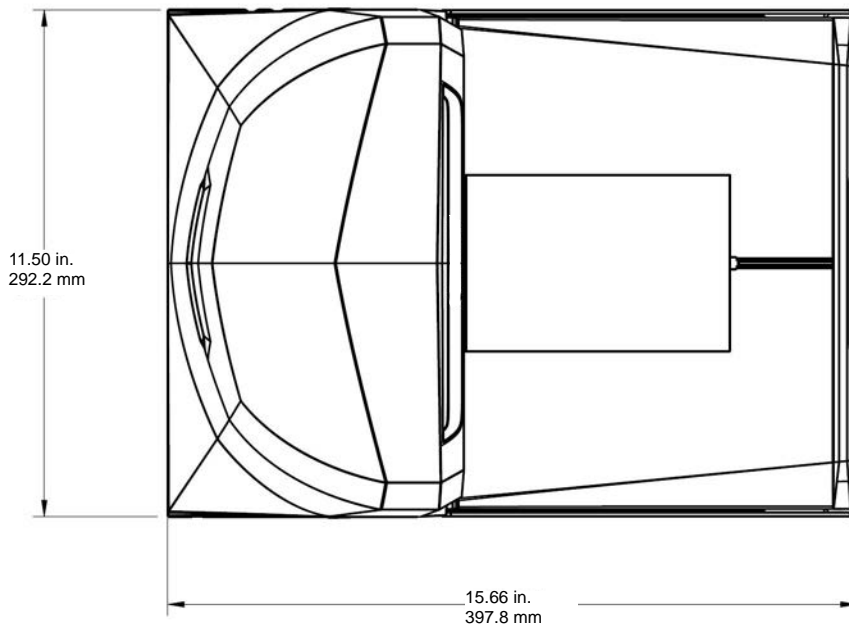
MP6000 - Medium Unit Top View Dimensions
